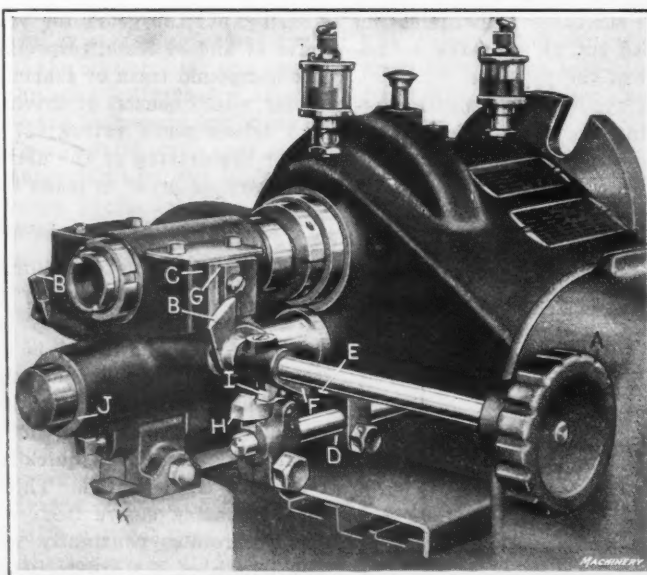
Screw-cutting Attachment for Lathe of Manufacturing Type
